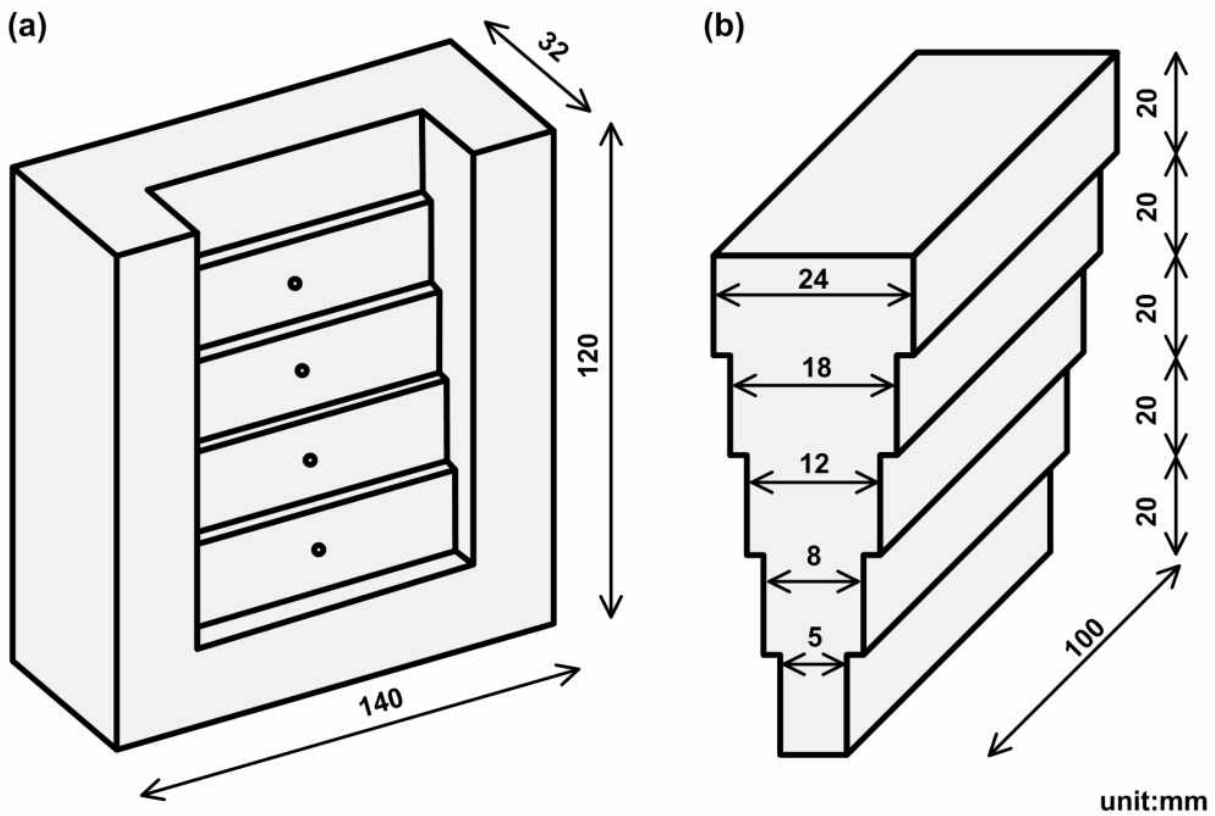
Schematic of the casting stepwise mold used in this study.
